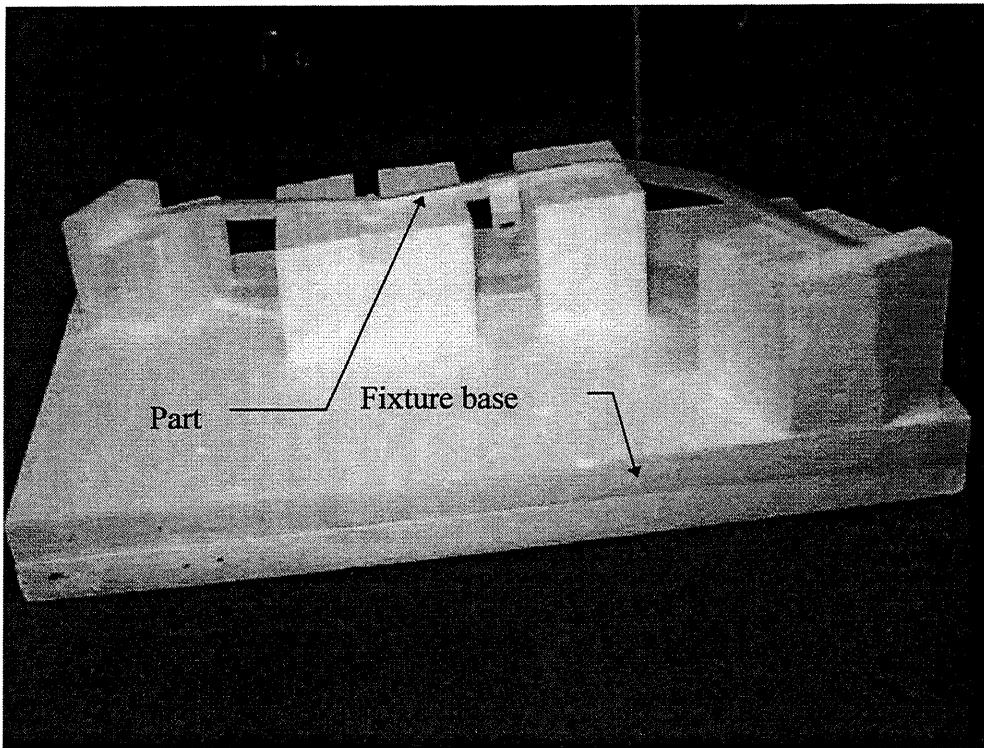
This figure shows the side view of the Multiple Tower fixture.
